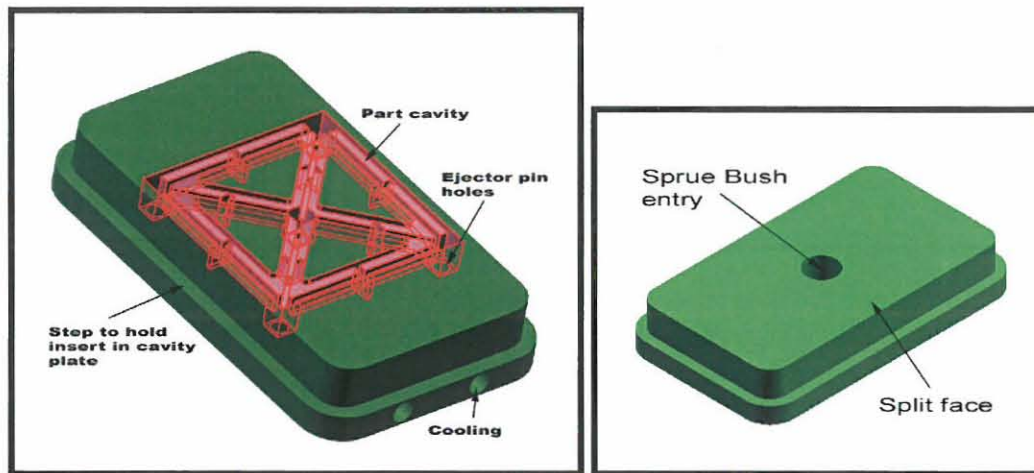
3D CAD Images of Cavity & Core Inserts.
